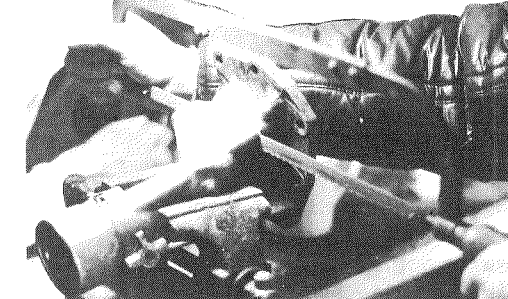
With the end plate bolted in place, tap the mainshaft through the main bearing with a copper or hide faced hammer until the 1st gear is as close to the rear casing as it will go. With the final rear thrust washer in place outside of the rear mainbearing, you should then just be able to fit the rear circlip. As specified, the end float of the 1st gear should be zero to 2 thou. However, on every box I've come across, there always seems to be some larger forward and backwards movement of the 1st gear along the shaft with seemingly no effect on the gearbox operation. (Thicker thrust washers are available if required).
